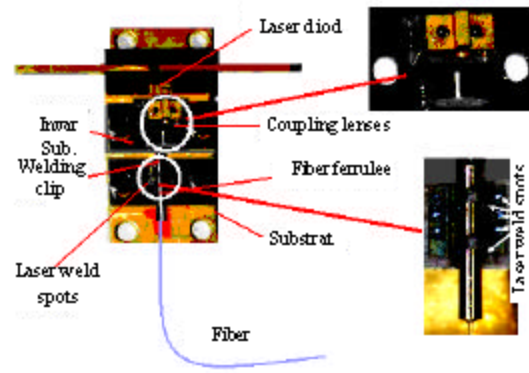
A pigtailed laser diode coupled via double ball lenses using laser welding
